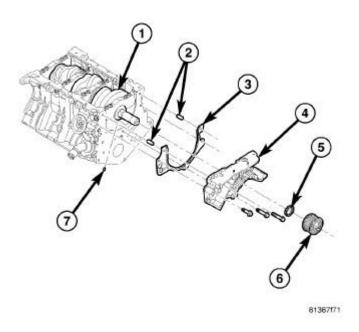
Oil Pump & Crankshaft Gear Assembly Courtesy of CHRYSLER LLC
